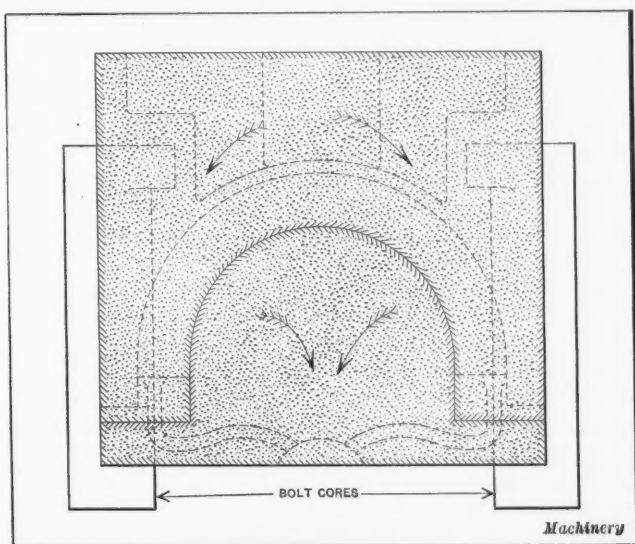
Assembly of the Cores used in molding the Casting, the Pattern of which is illustrated in Fig. 3
